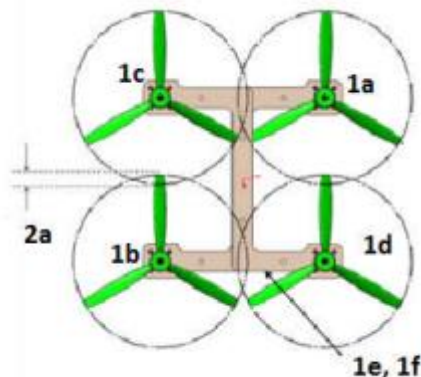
Illustrates top view of VOOPS Quadrotor showing overlap, propellers, upper & lower Z frame;
